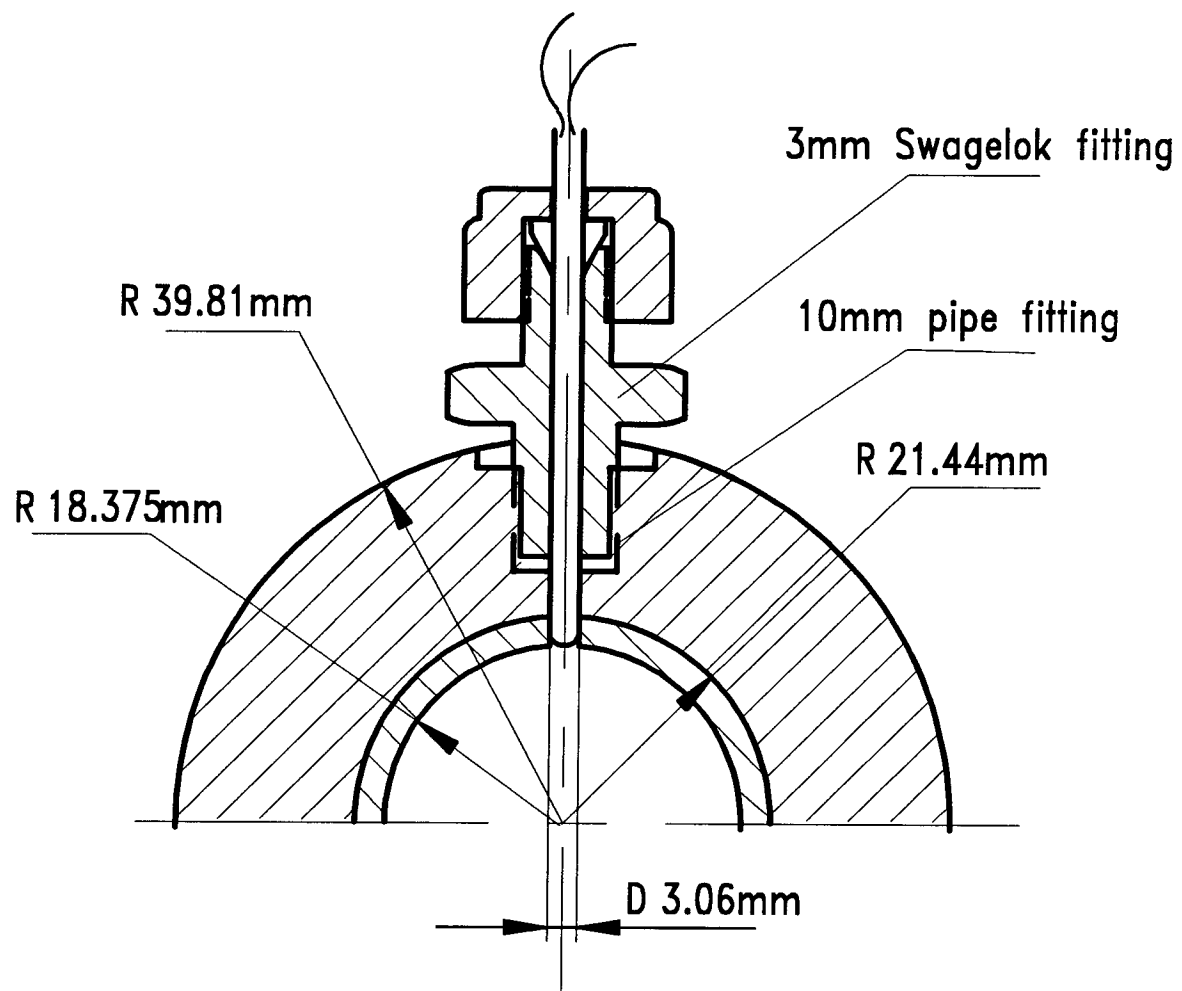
Details of a thermocouple mounted on the screw barrel.
